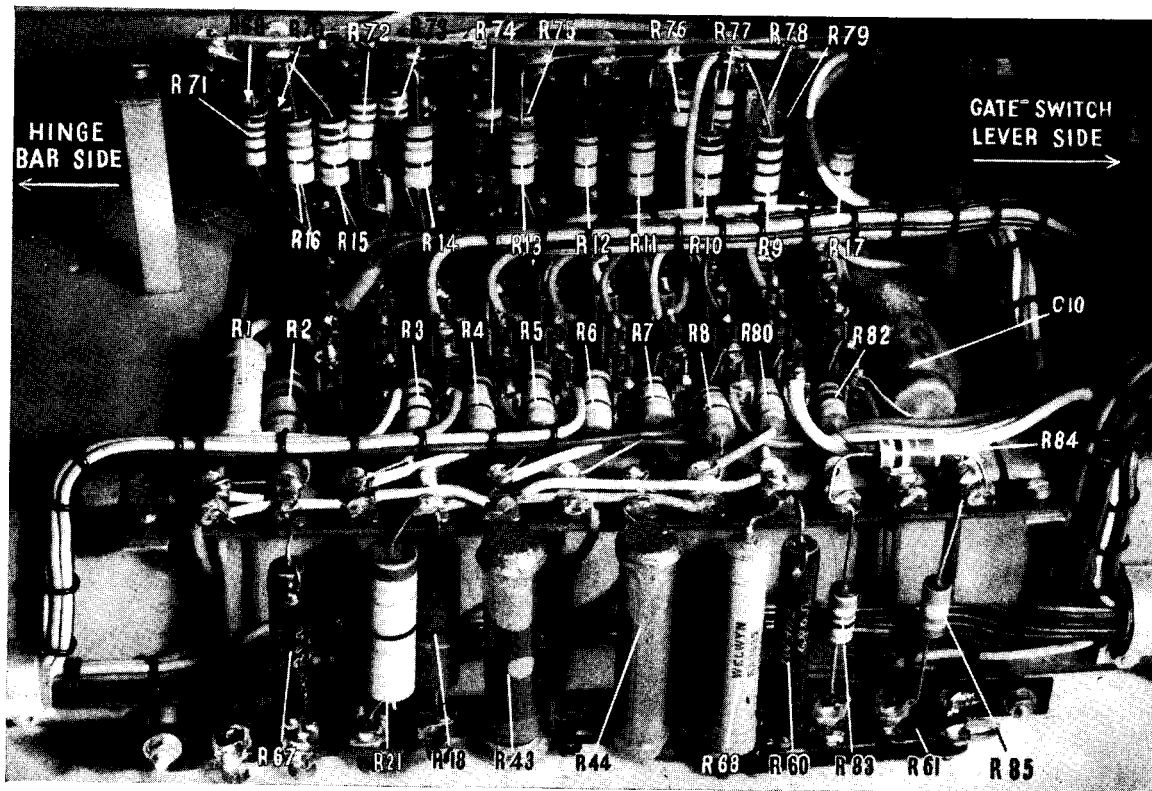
DETAILED VIEW OF RESISTORS MOUNTED BEHIND THE GATE
